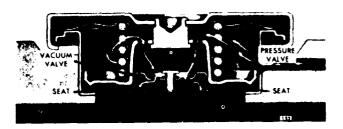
F-13. Pressure Control Cap (Vacuum Valve Open)
